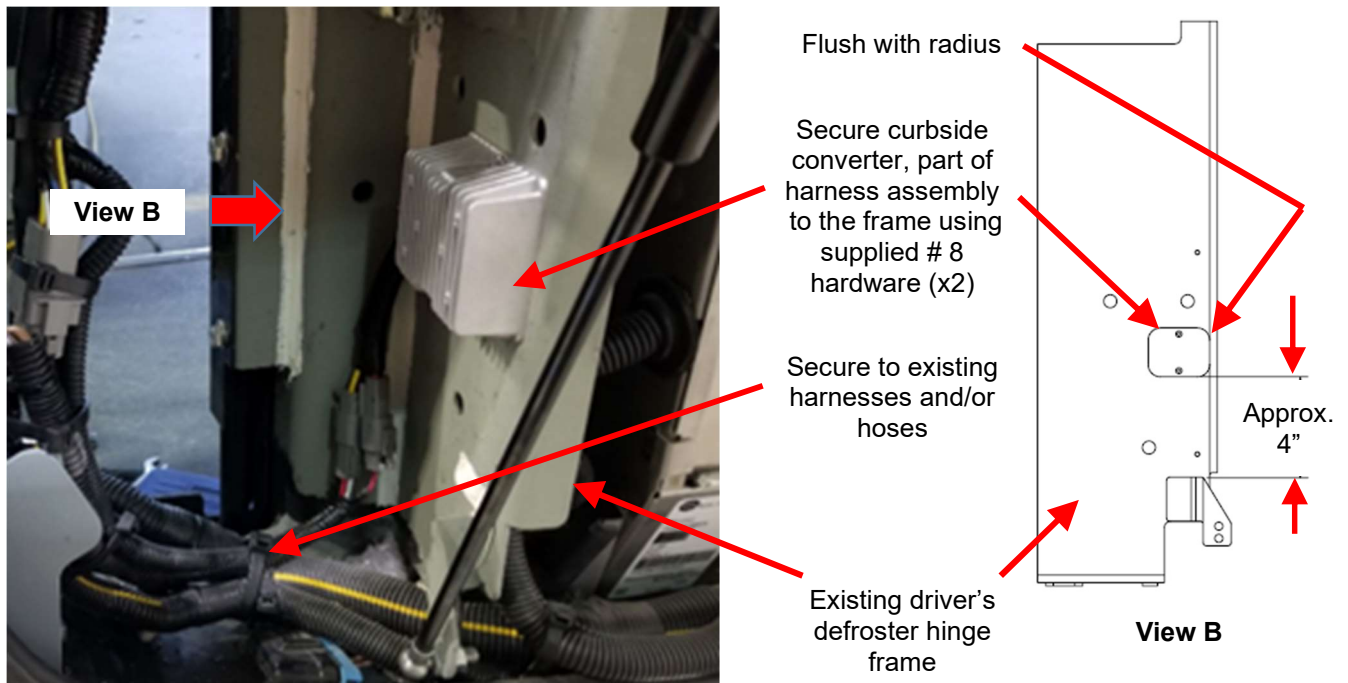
Curbside Headlamp Assembly Harness and Converter Installation
